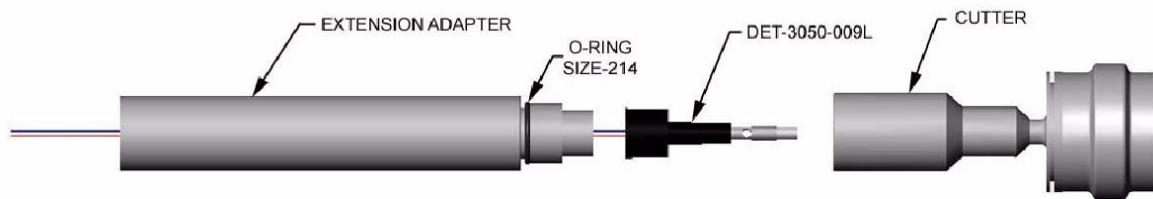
Arming Method for NT Drill Pipe Cutters - Exploded View
